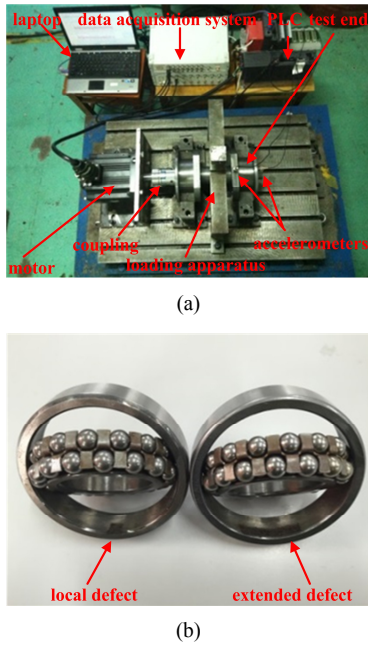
Bearing experiment: (a) Experimental platform; (b) local defect and extended defect bearings.
